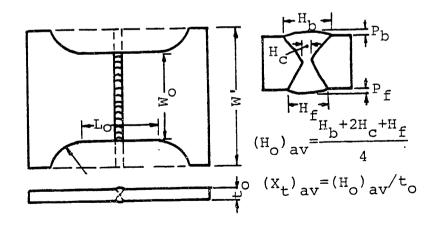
(b): Specimen design and dimensions for static tensile tests
